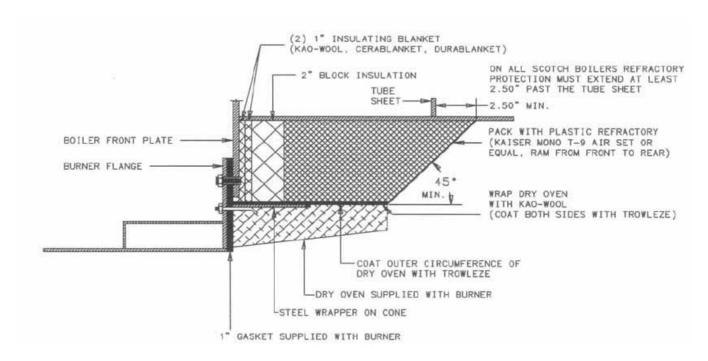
Burner Mounting Details for Scotch Marine Boilers
